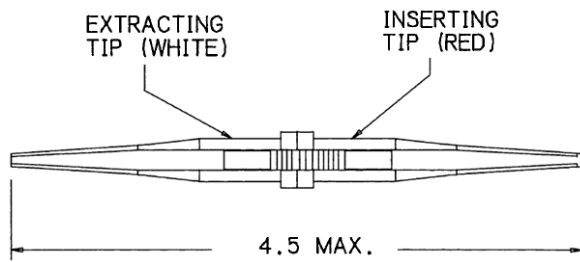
wire connector insertion/ removal tool (15190)
